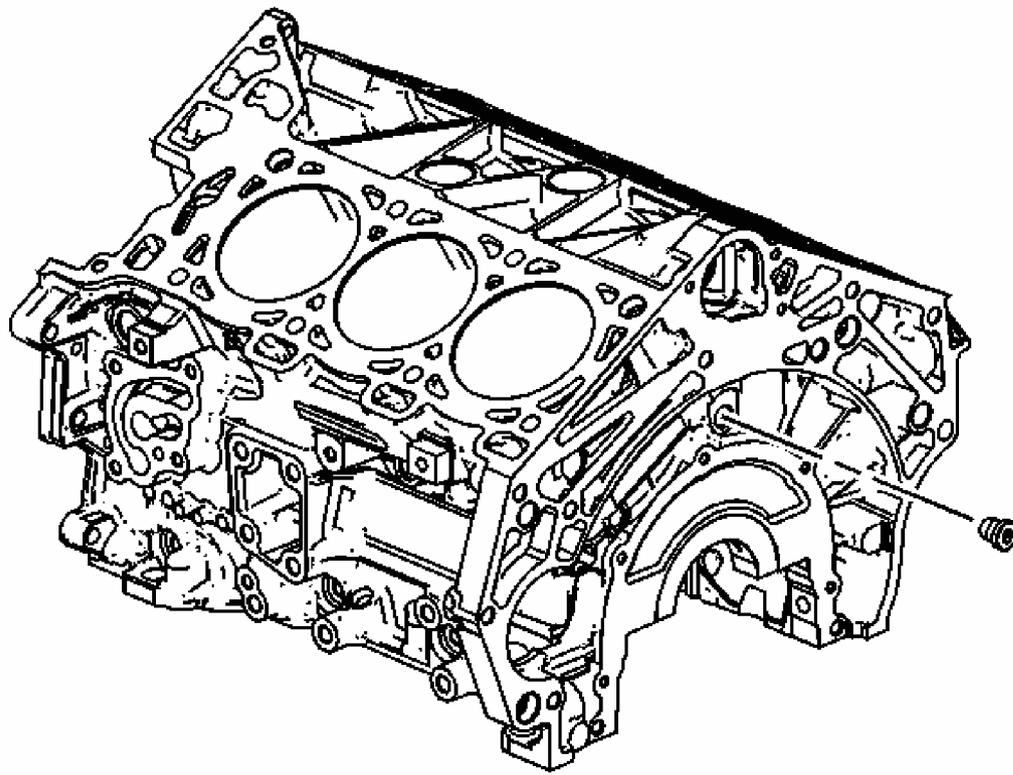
M14 Rear Oil Gallery Threaded Plug
